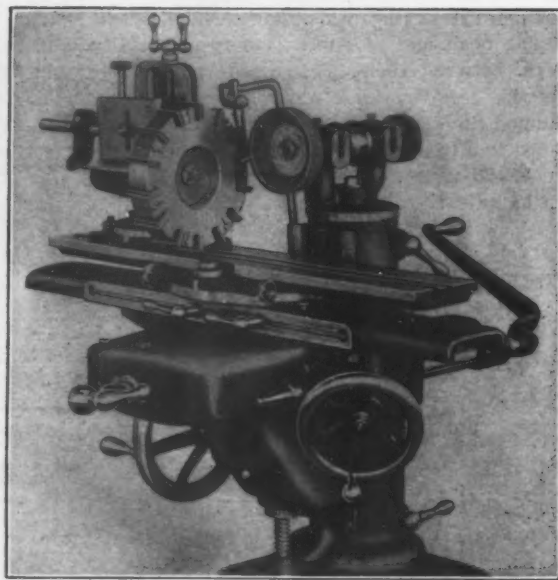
Grinding the Ends of the Teeth of the Cutter Shown in Fig. 7.
